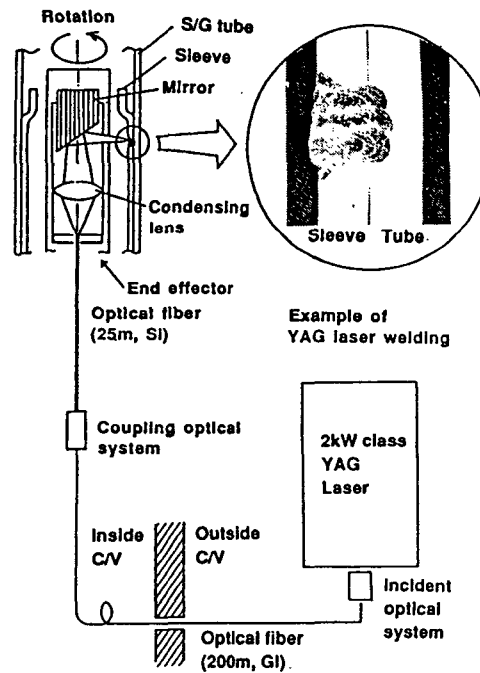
YAG laser repair welding of steam generator of nuclear power plant [9]
